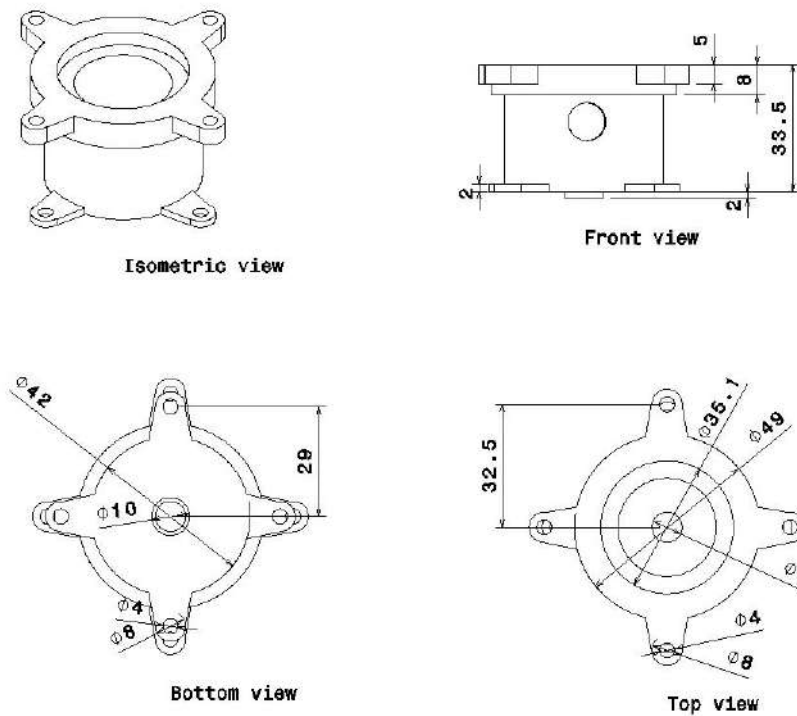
Body part technical draw with isometric, front, top and bottom views (units in mm).
